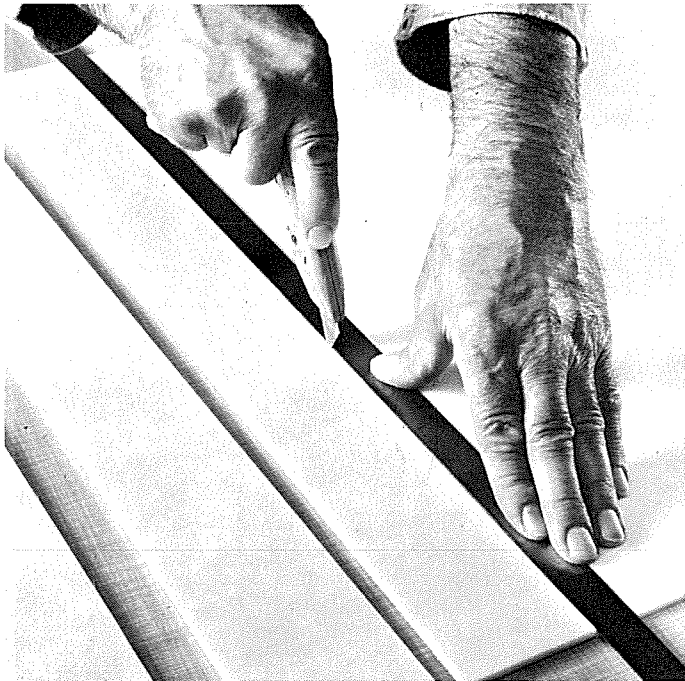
Thin sheets are cut with a knife. Thicker sheets can be scored with a knife to half their depth and then broken. A particularly clean fracture is obtained by breaking the sheet at the edge of a table.
